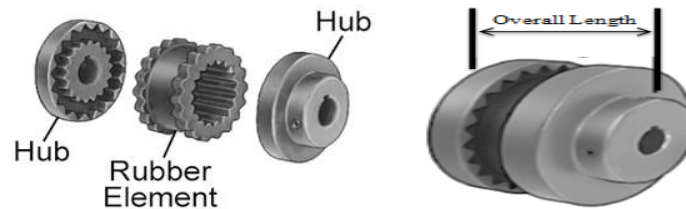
Multi-flex Shaft Coupling Parts (Left); Assembled Model (Right)
